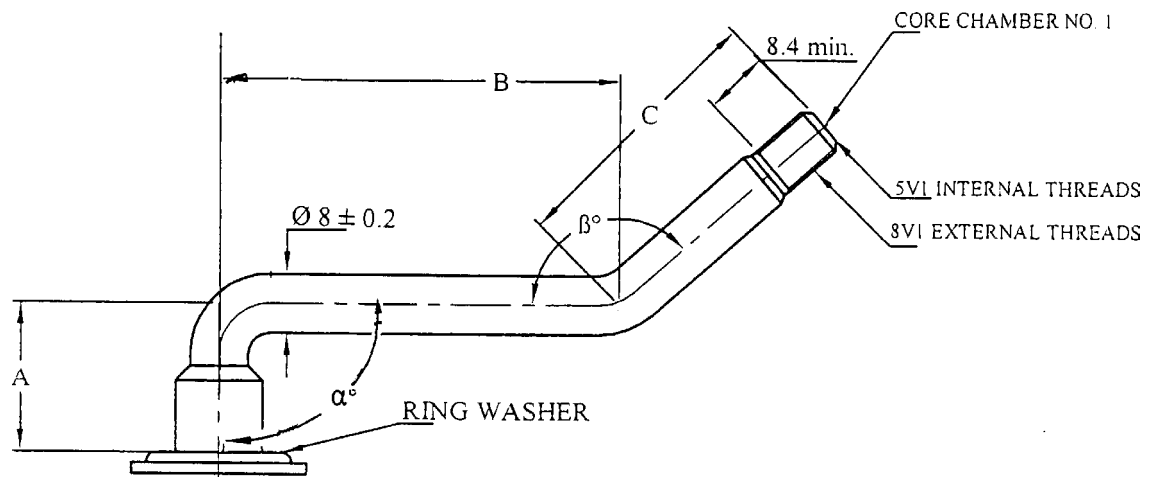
SCREW-ON UNIVERSAL TUBE VALVE SPUDS — TRUCK AND BUS VALVES
